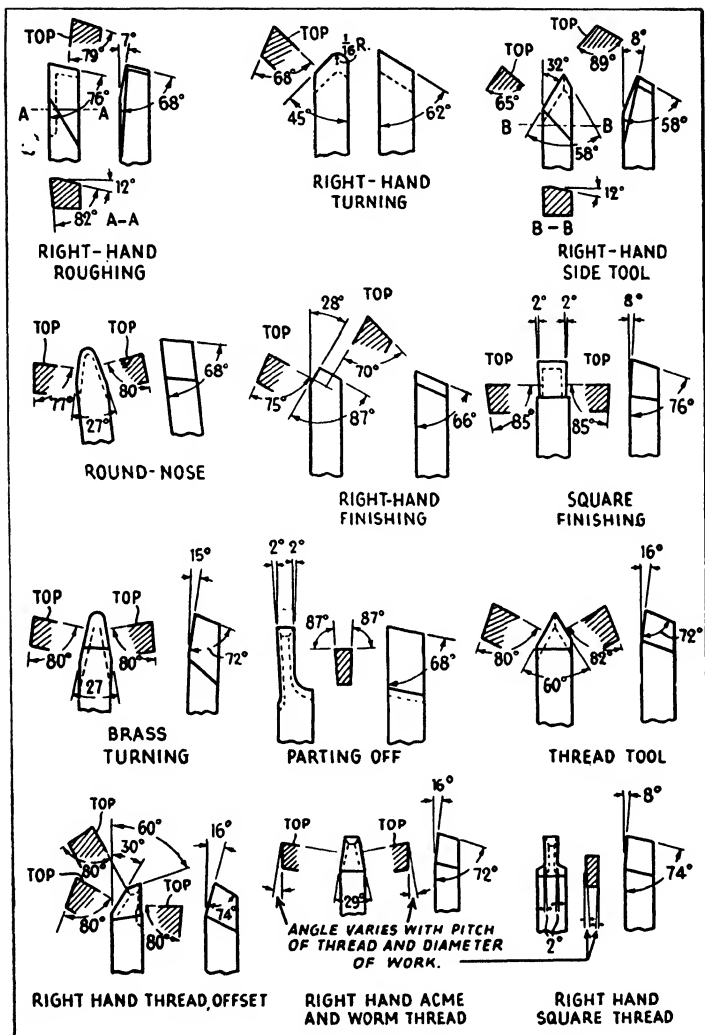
ANGLES USED ON TYPICAL LATHE TOOLS
